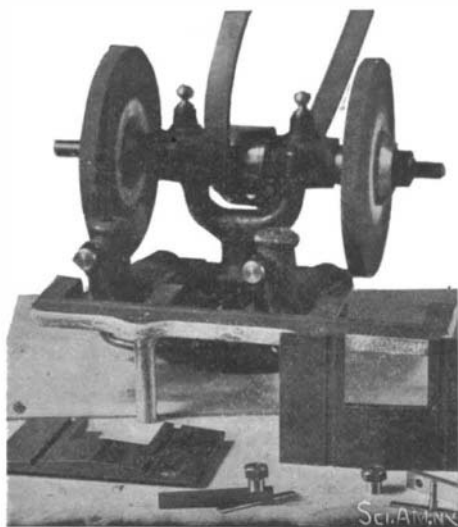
TOOL GRINDER WITH REST DETACHED.
